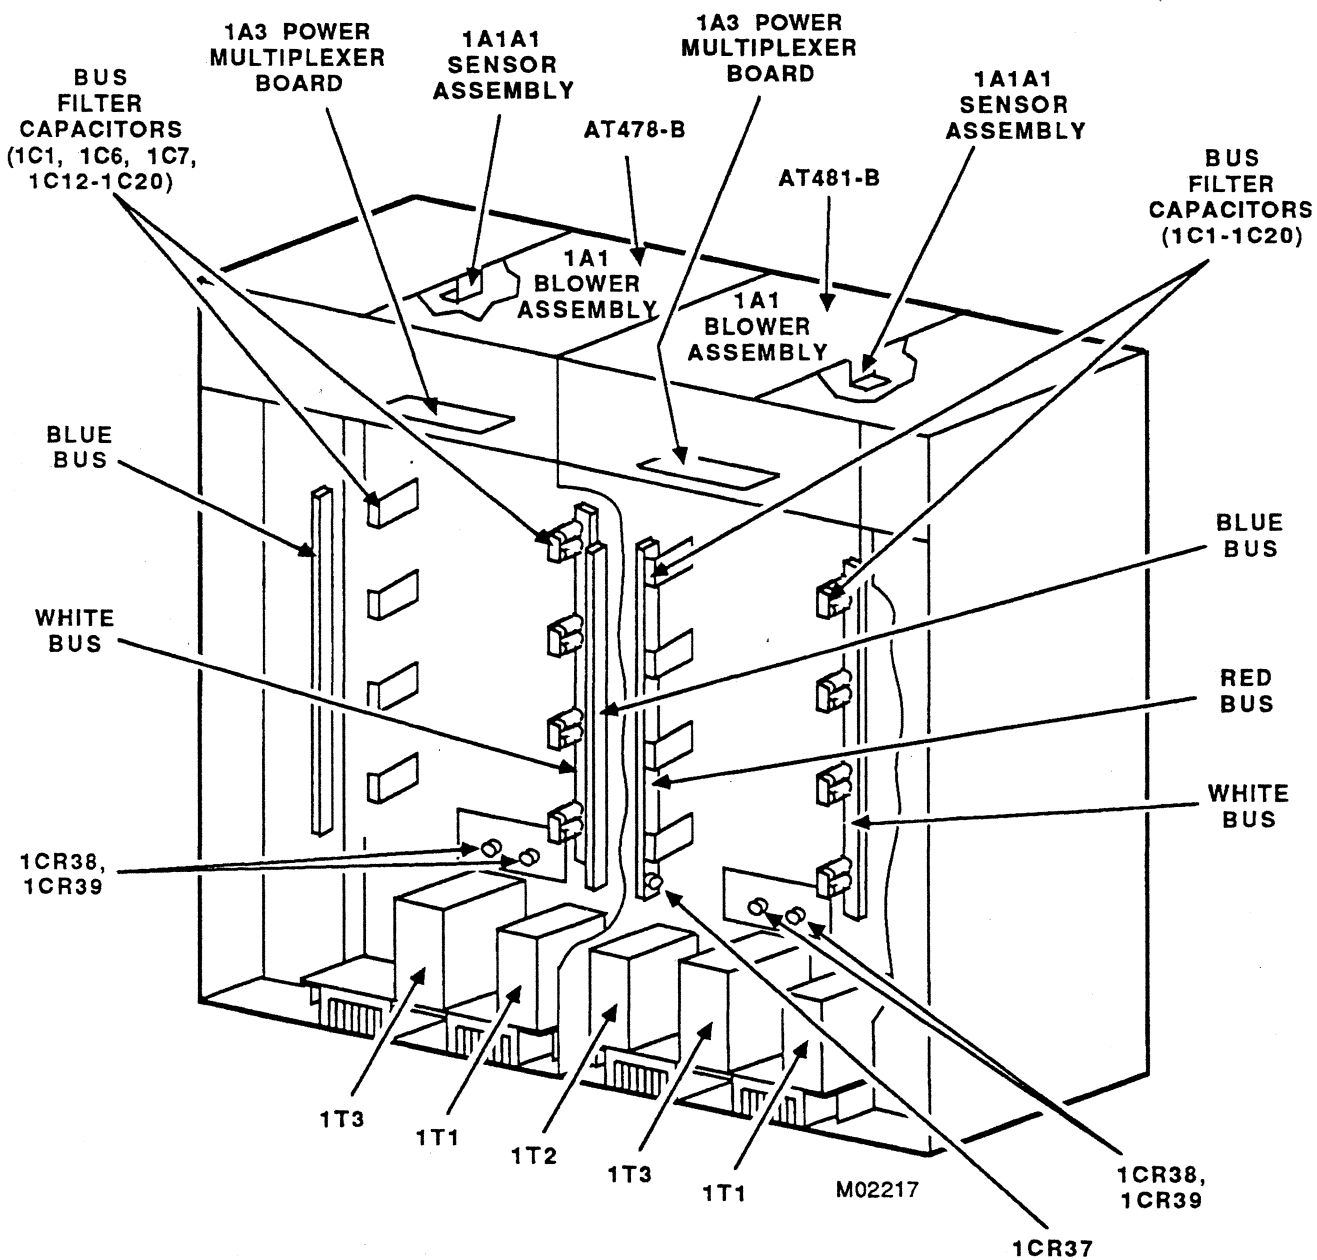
Cabinet Rear View, Selected Assembly Locator
